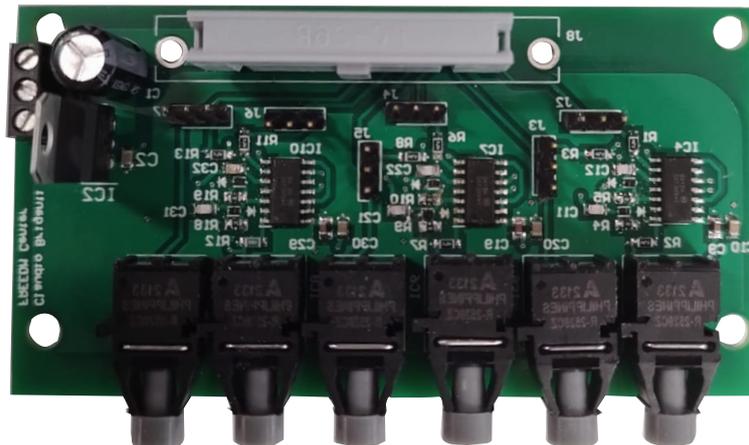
Fiber optic adapter plus dead band generator PCB board
